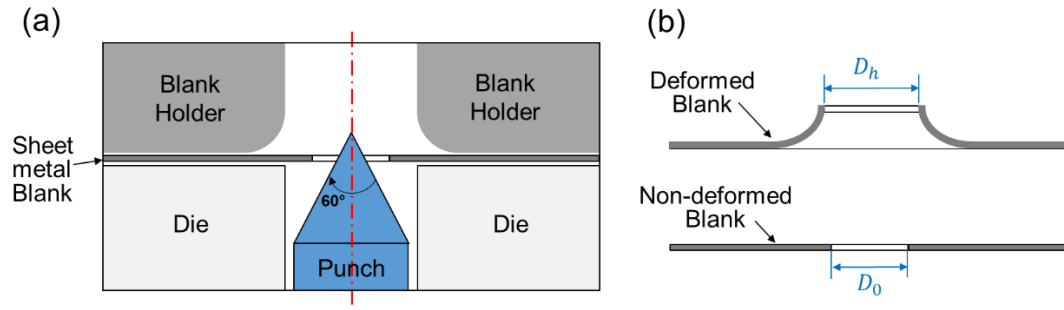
(a) Schematic of hole expansion test, (b) measurements for the hole expansion ratio.
